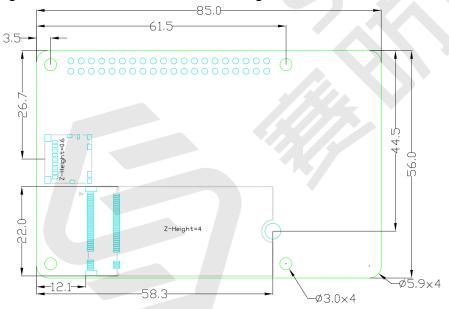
VisionFive 2 Lite Mechanical Drawing - Bottom View
